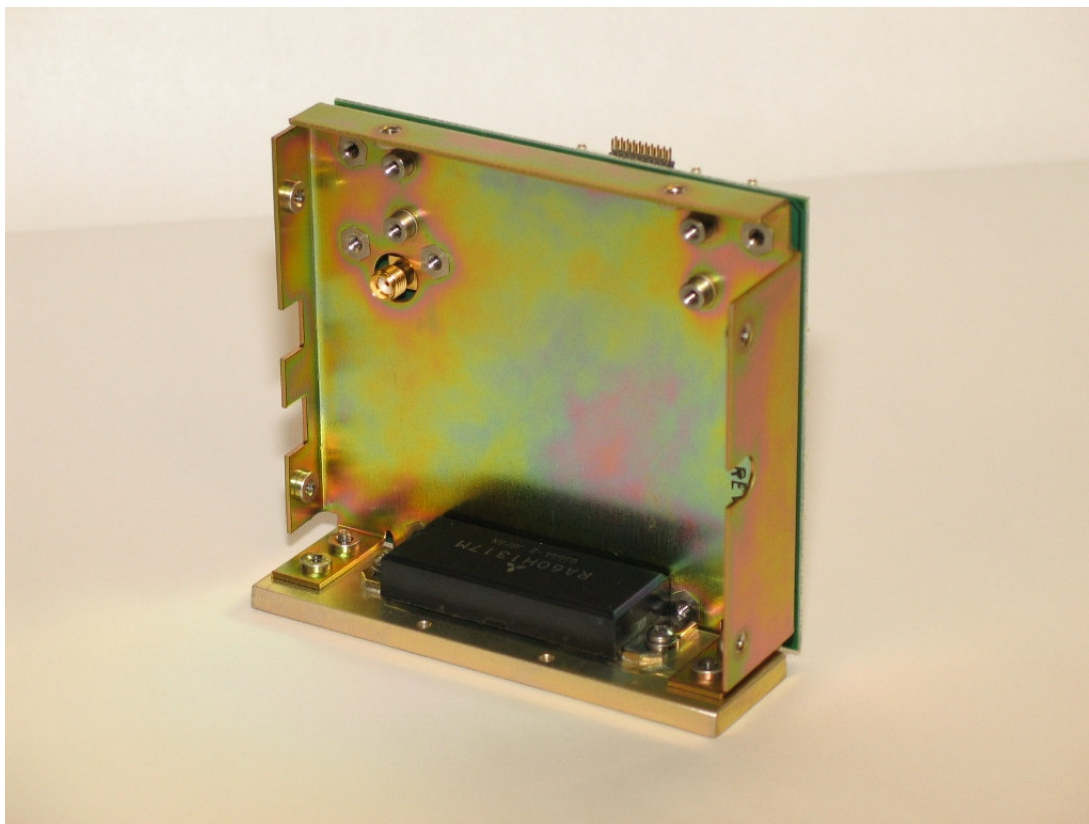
E-5 High Band Assembly, rear, (RF power amp visible)
